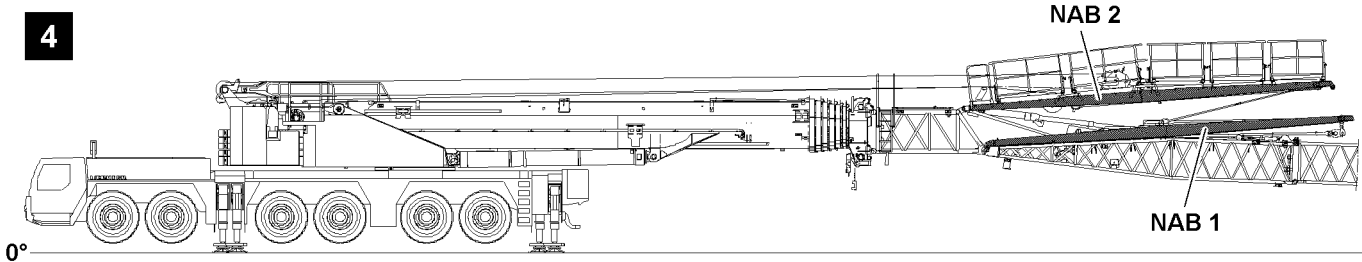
Guying in transport receptacle(s) and NA-frames placed down to the front (example telescopic crane)
